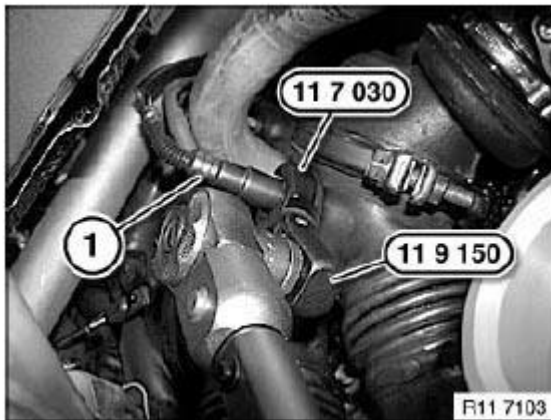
Identifying Special Tool 11 7 030 And 11 9 150
